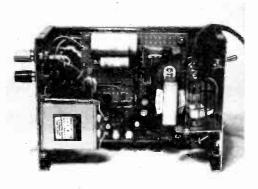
Completed Tele-Spy. Final assembly results in tight quarters. To avoid burning wires when soldering, follow assembly steps in the text.
